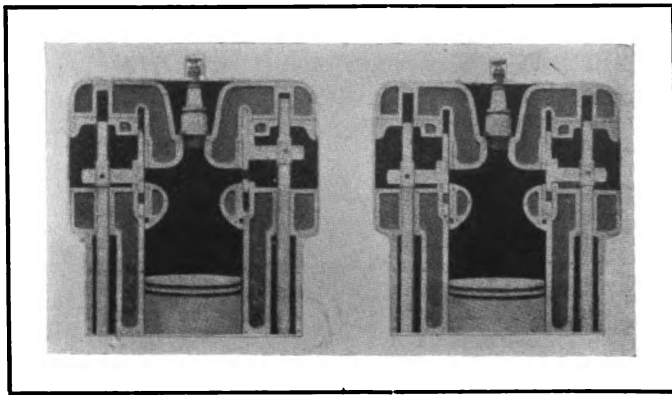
Sectional Views of Cooper Slide Valve Engine: At Left, the Piston Is Shown Ascending on the Exhaust Stroke and the Exhaust Port on the Right Hand Cylinder Is Open; at Right, the Piston Is Descending on the Impulse Stroke and Both Valves Are Closed.
